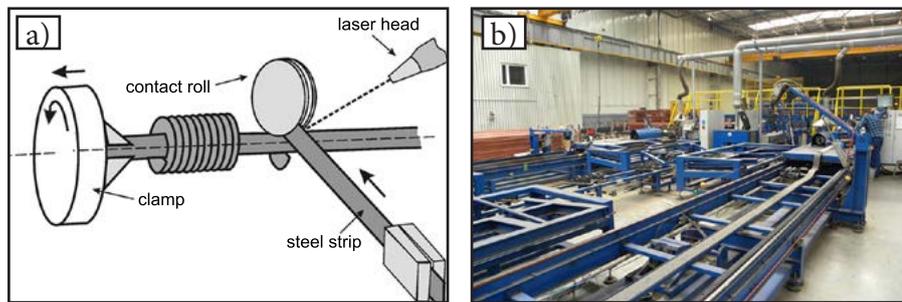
Laser welding of fin tubes: a) schematic diagram of the welding station, b) automated line for the welding of fin tubes at the Centre for Innovative Laser Technologies (CITL) Energoinstal SA [5]
